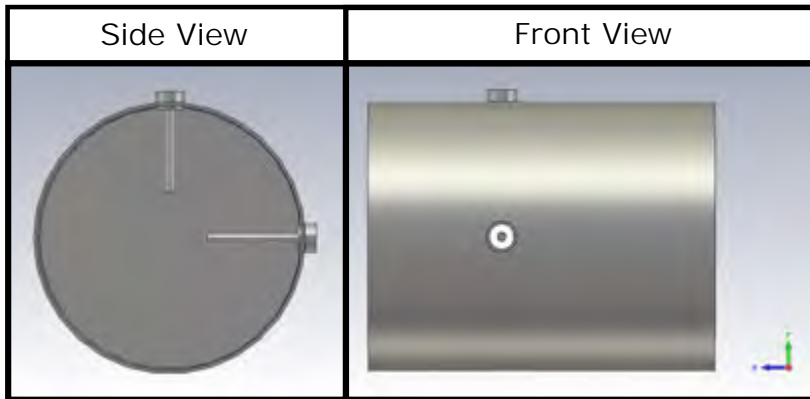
Built waveguide CAD design. (Left) Front view. (Right) Side view.
